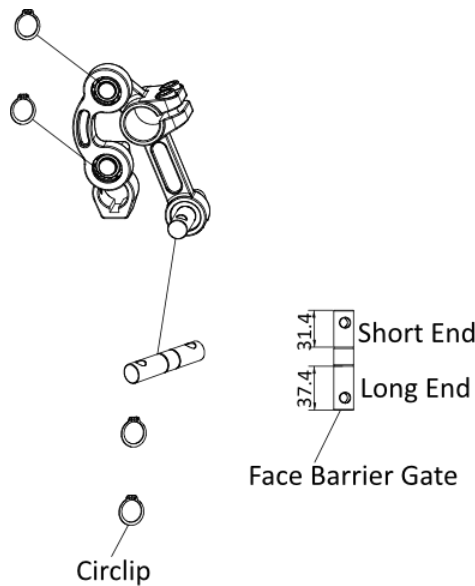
Disassemble and Reinstall Crank Arm and Linkage Arm
